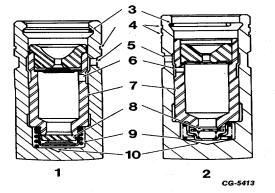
Sectional View of Hydraulic Tappets Showing Types "A" and "B"
